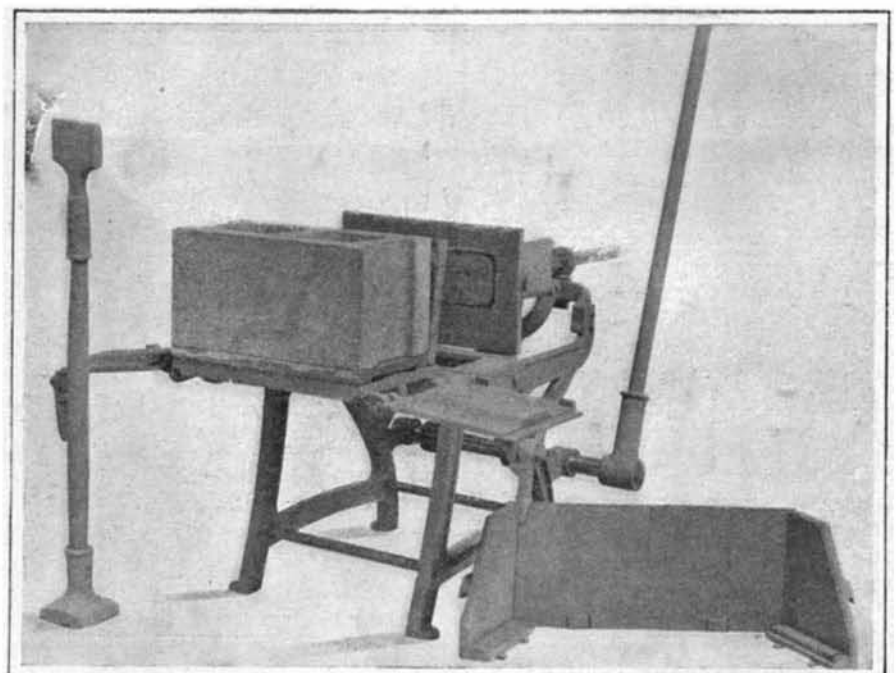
Face-Down Machine with Core-Withdrawing Lever.
